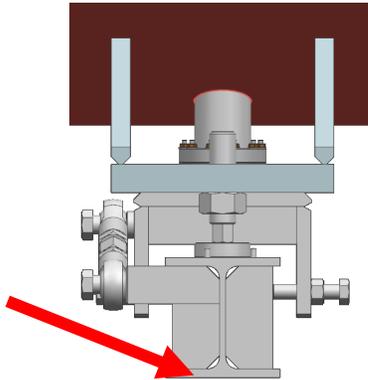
Interface plane between LB650-provided adjustment stage and Facility-provided girder shown with red arrow
